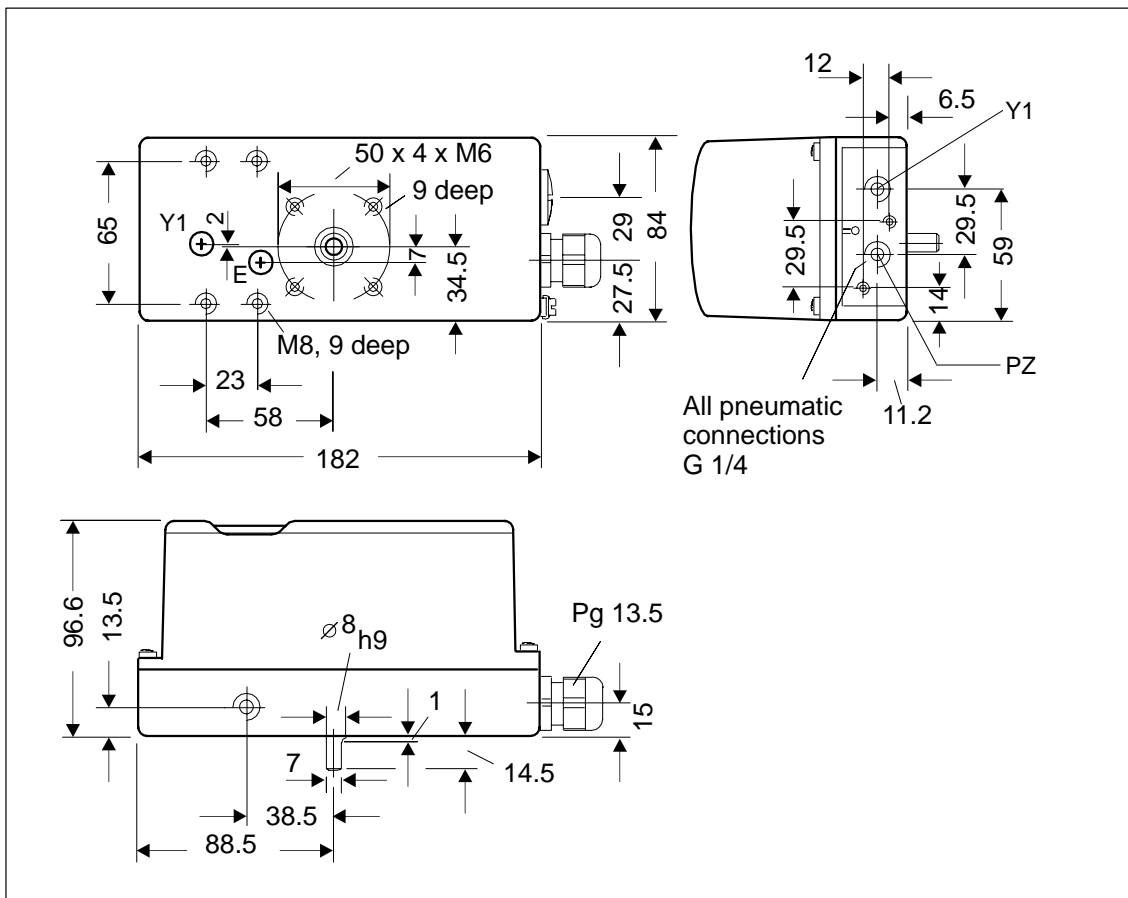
Dimension drawing of metal housing version 6DR4x01-xx
